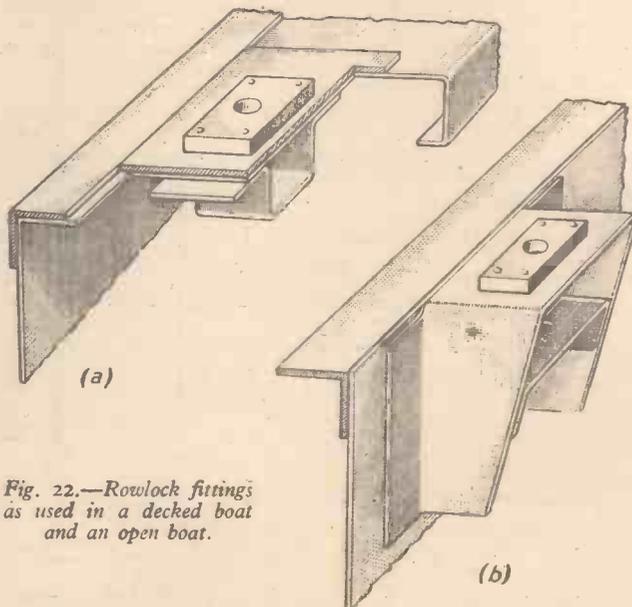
Rowlock fittings as used in a decked boat and an open boat.
